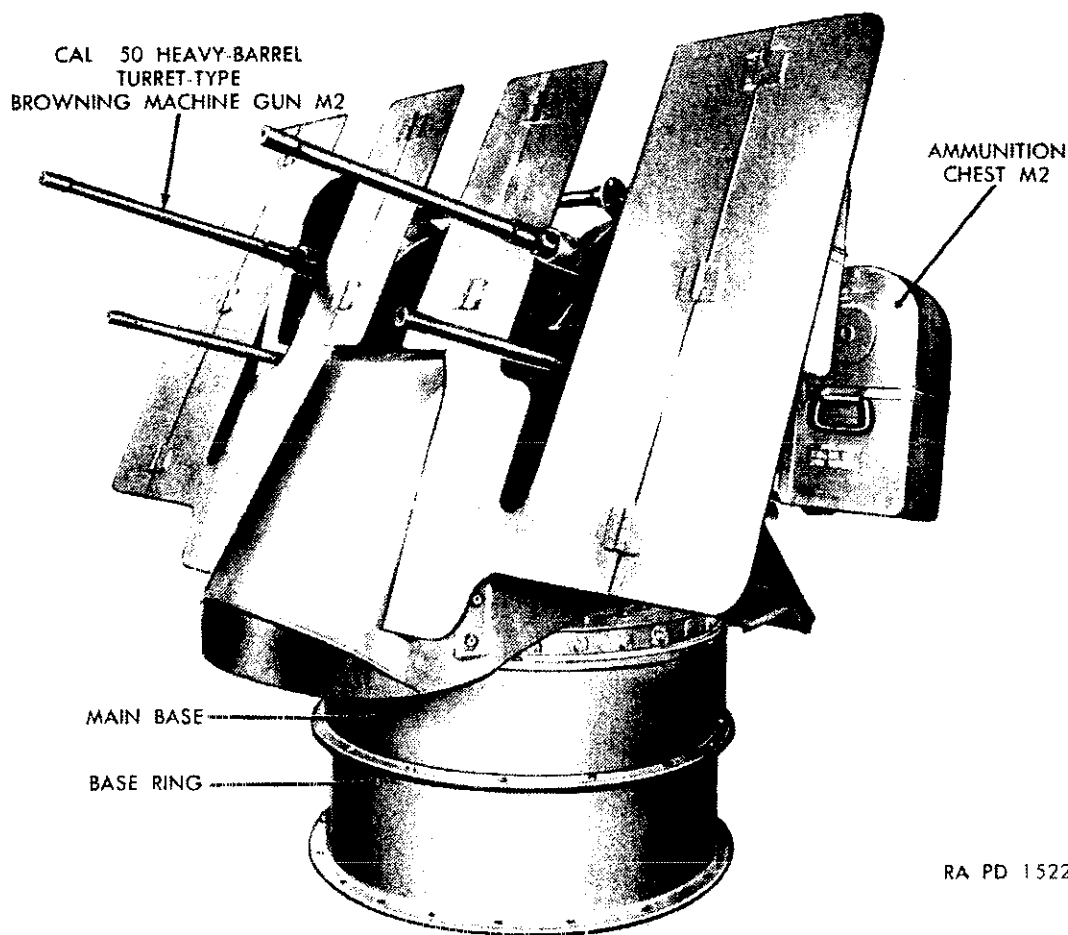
Multiple cal. .50 machine gun mount M45C—right-front view.
